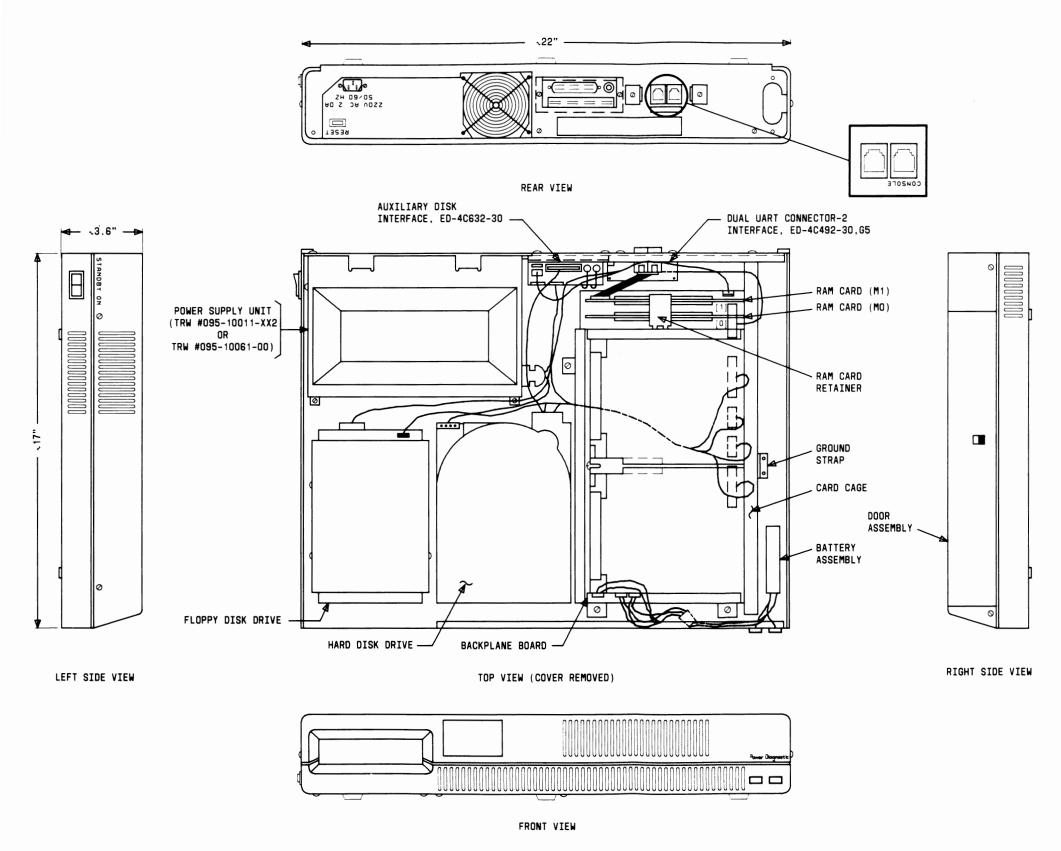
International 3B2/310 Computer Cabinet Assembly Drawing (ED-4C646-30)
